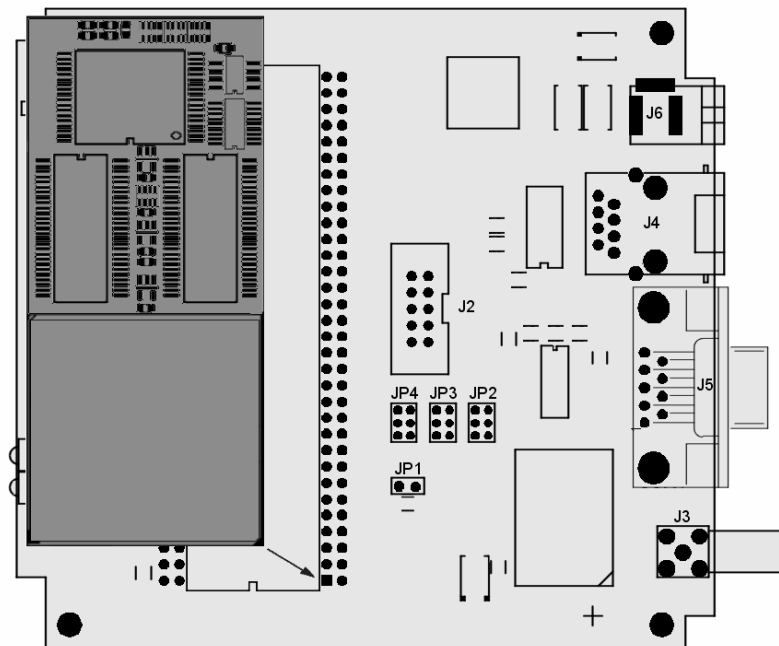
Position of the DIL/NetPC on the BlueTooth™ Carrier Board
